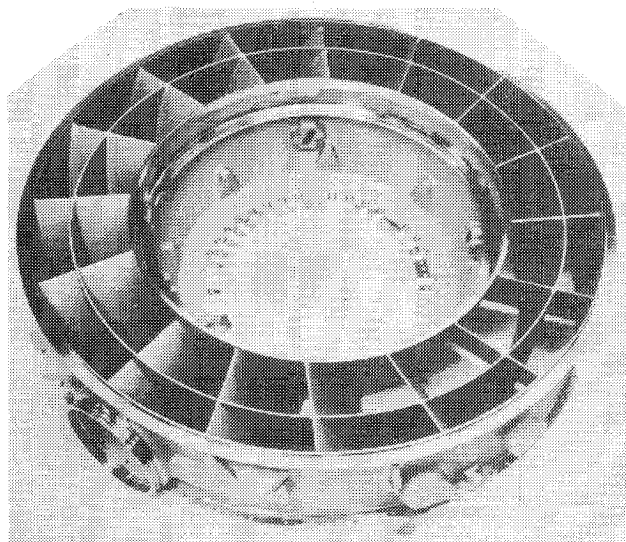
Finished machined part Pratt & Whitney F100-II intermediate case—large titanium investment casting.
